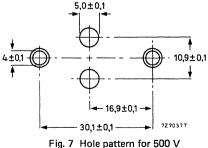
Hole pattern for 500 V insulation, nut fastening.
